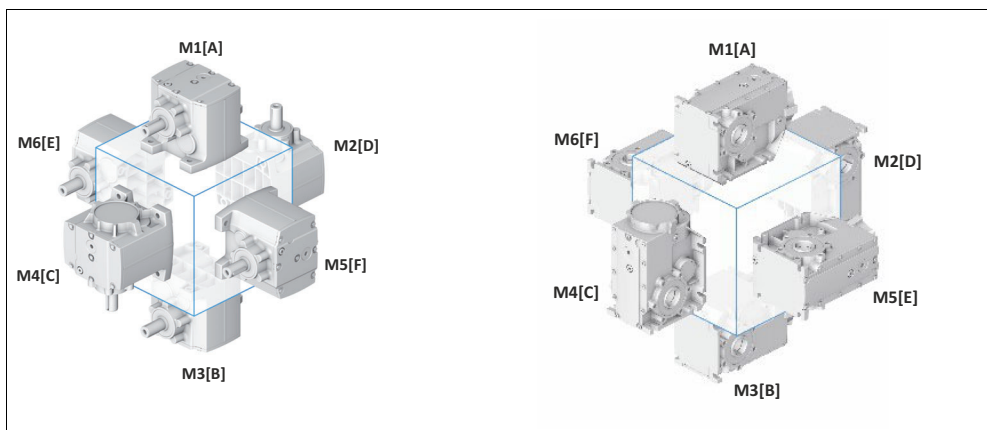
Example of mounting positions on a H gearbox: new designation [old designation]
